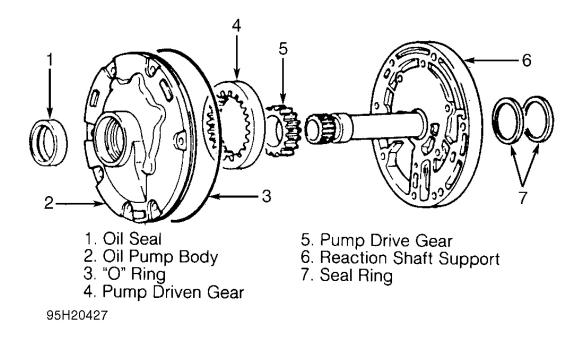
Exploded View Of Oil Pump Assembly Courtesy of ISUZU MOTOR CO.
